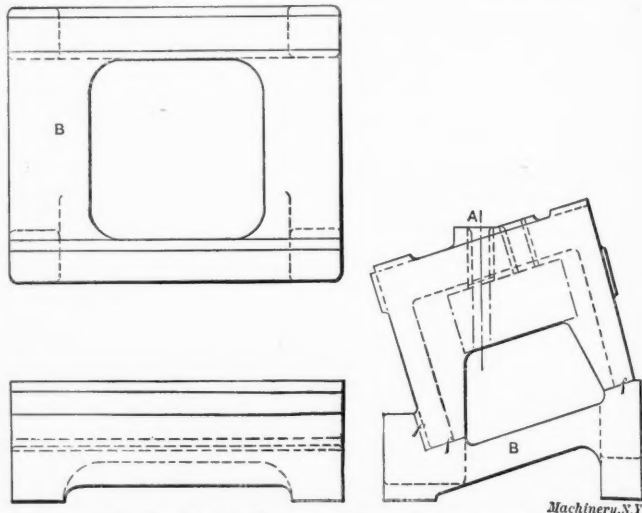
Jig and Stand for Drilling Holes at an Angle.
